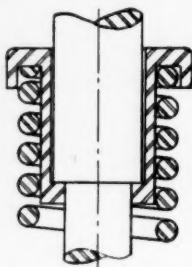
Some designs of spring caps center the spring both inside and outside for a short distance, as shown in this cross-sectional sketch.
